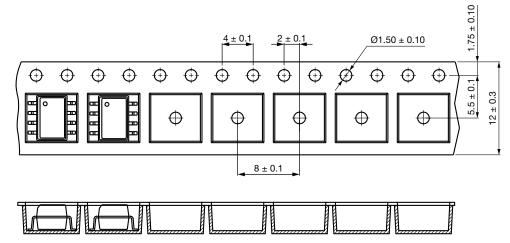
Tape and Reel Packaging (2000 pieces on reel)
